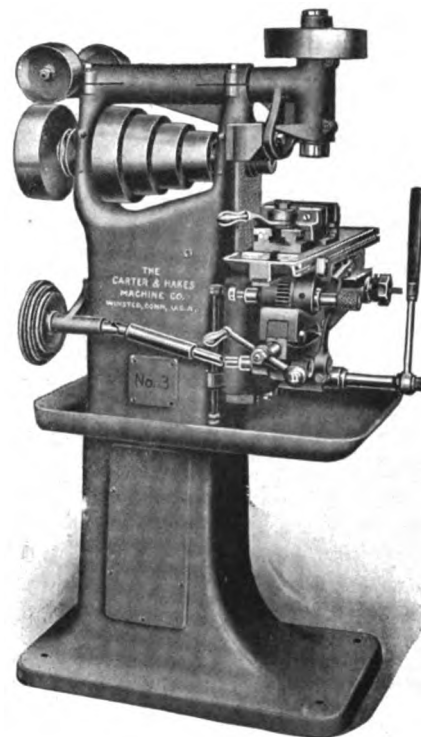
No. 3 Hand Milling Machine with Power Feed and Vertical Attachment
